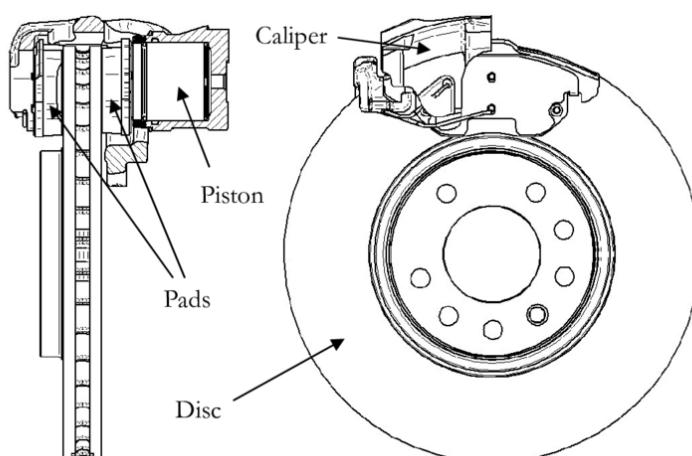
Disc brake assembly with a single-piston floating caliper and a ventilated disc (Wahlström, 2020, p.1).
